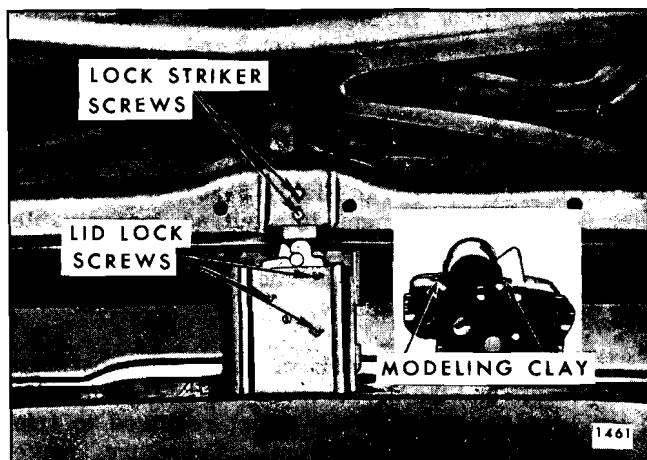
Rear Compartment Lid Lock Assembly -
